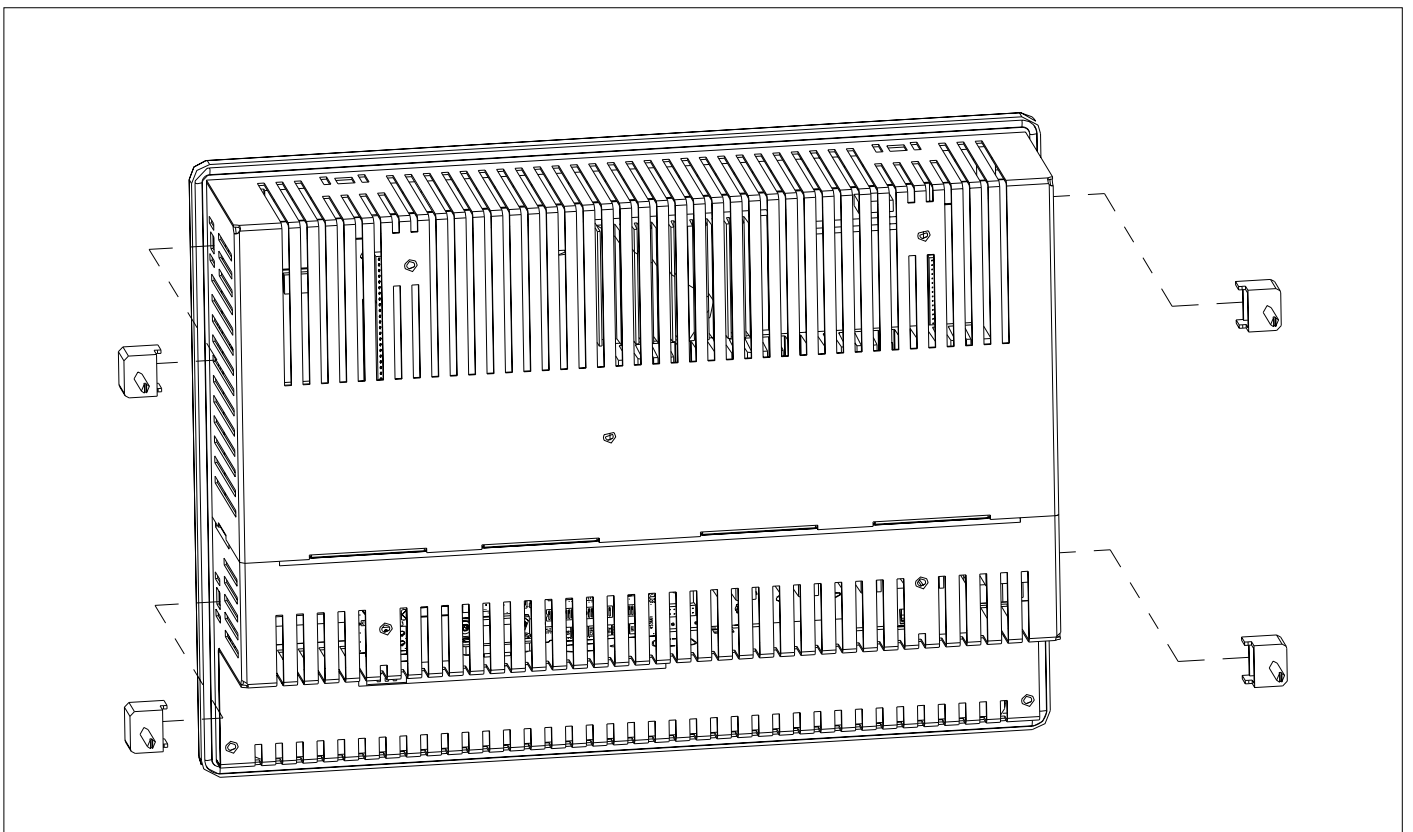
Panel mounting GF\_VEDO HL 150CT
